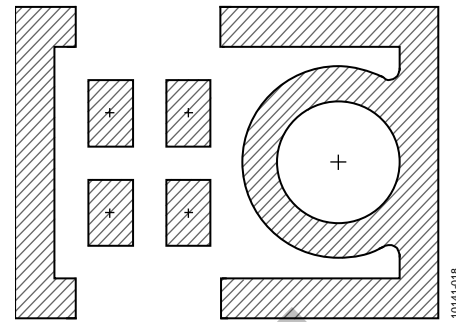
Example PCB Land Pattern with Broken Enclosing Ring
